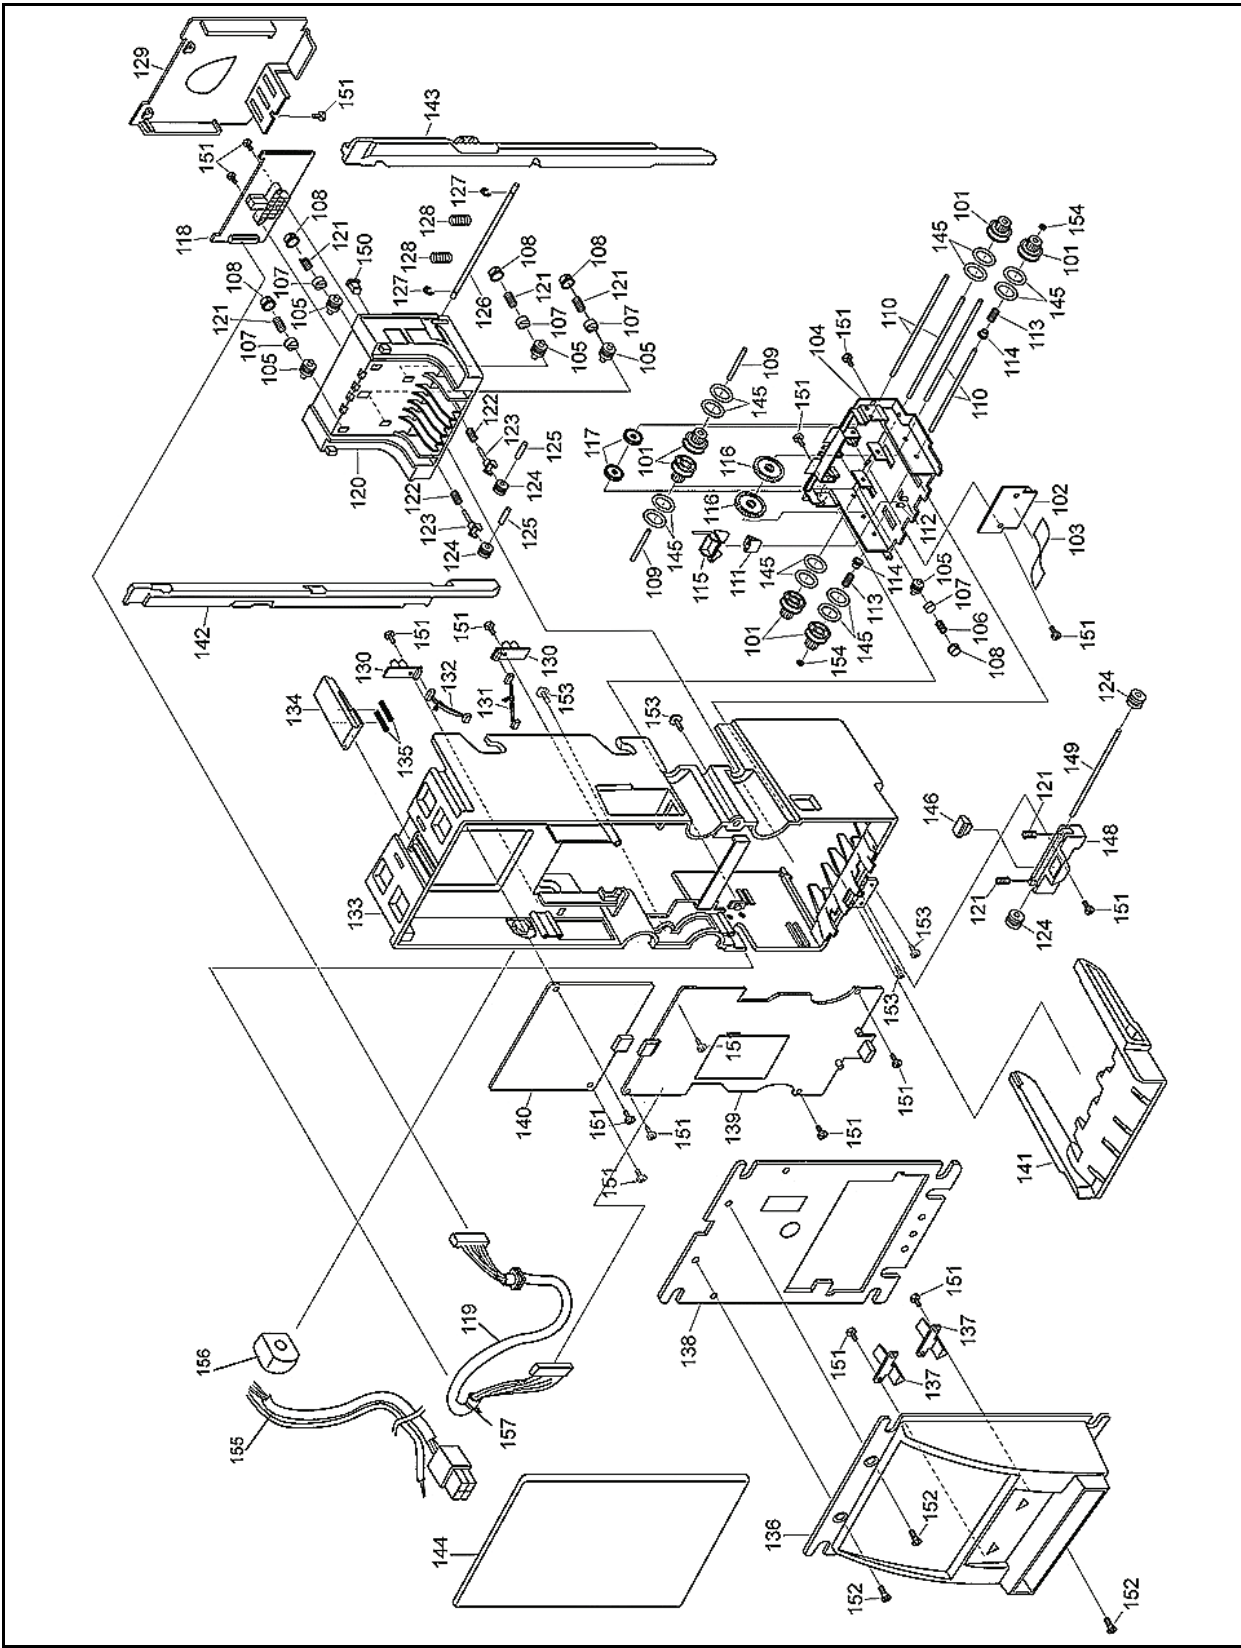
Frame and Upper/Lower Guide Assembly Exploded View Diagram
